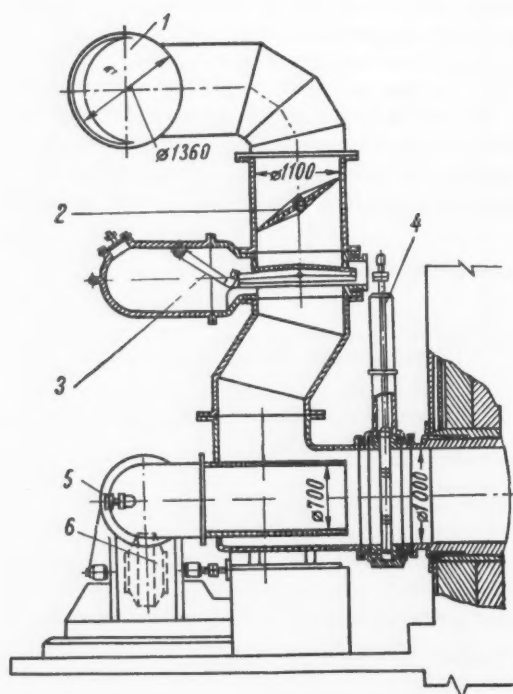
Gas burner. 1) Clean gas main; 2) gas-regulating butterfly valve; 3) gas cut-off valve; 4) isolating slide; 5) photocell; 6) fan.
